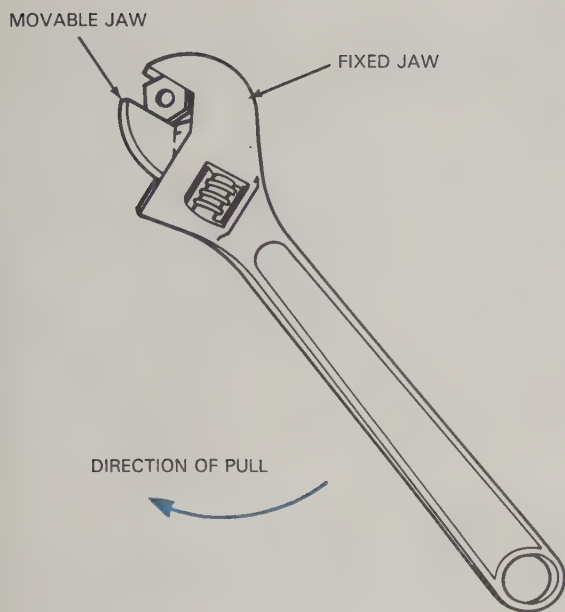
When using an adjustable wrench, pull only in the direction shown, so that force is exerted on the fixed jaw.
